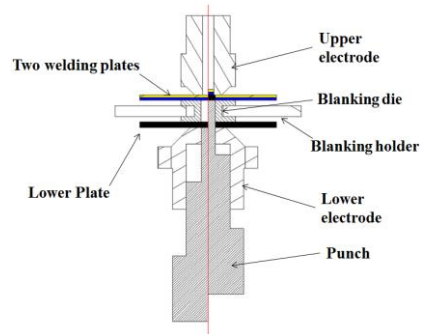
Section view of extru-riivet spot welding die assembly
